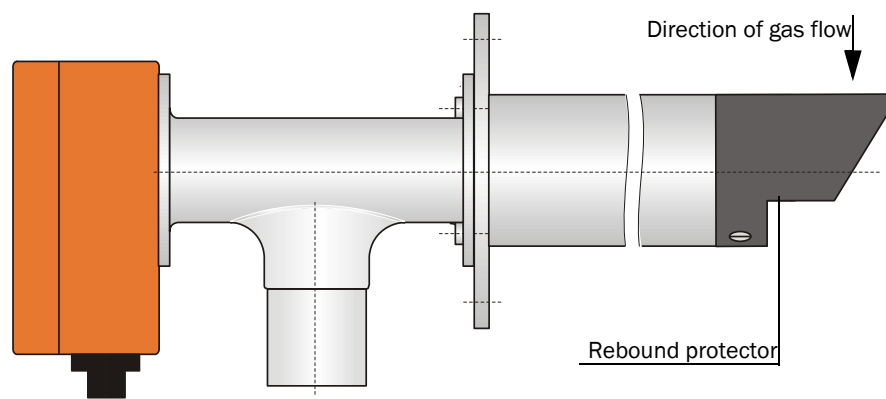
Assembly of the rebound protector for the types FLSE100-PH and PHS
